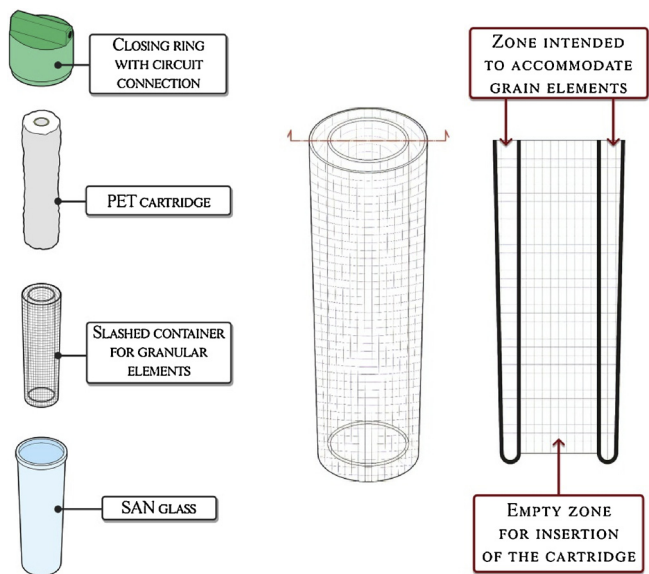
Assonometric view of the designed filter, indicating the different components.
